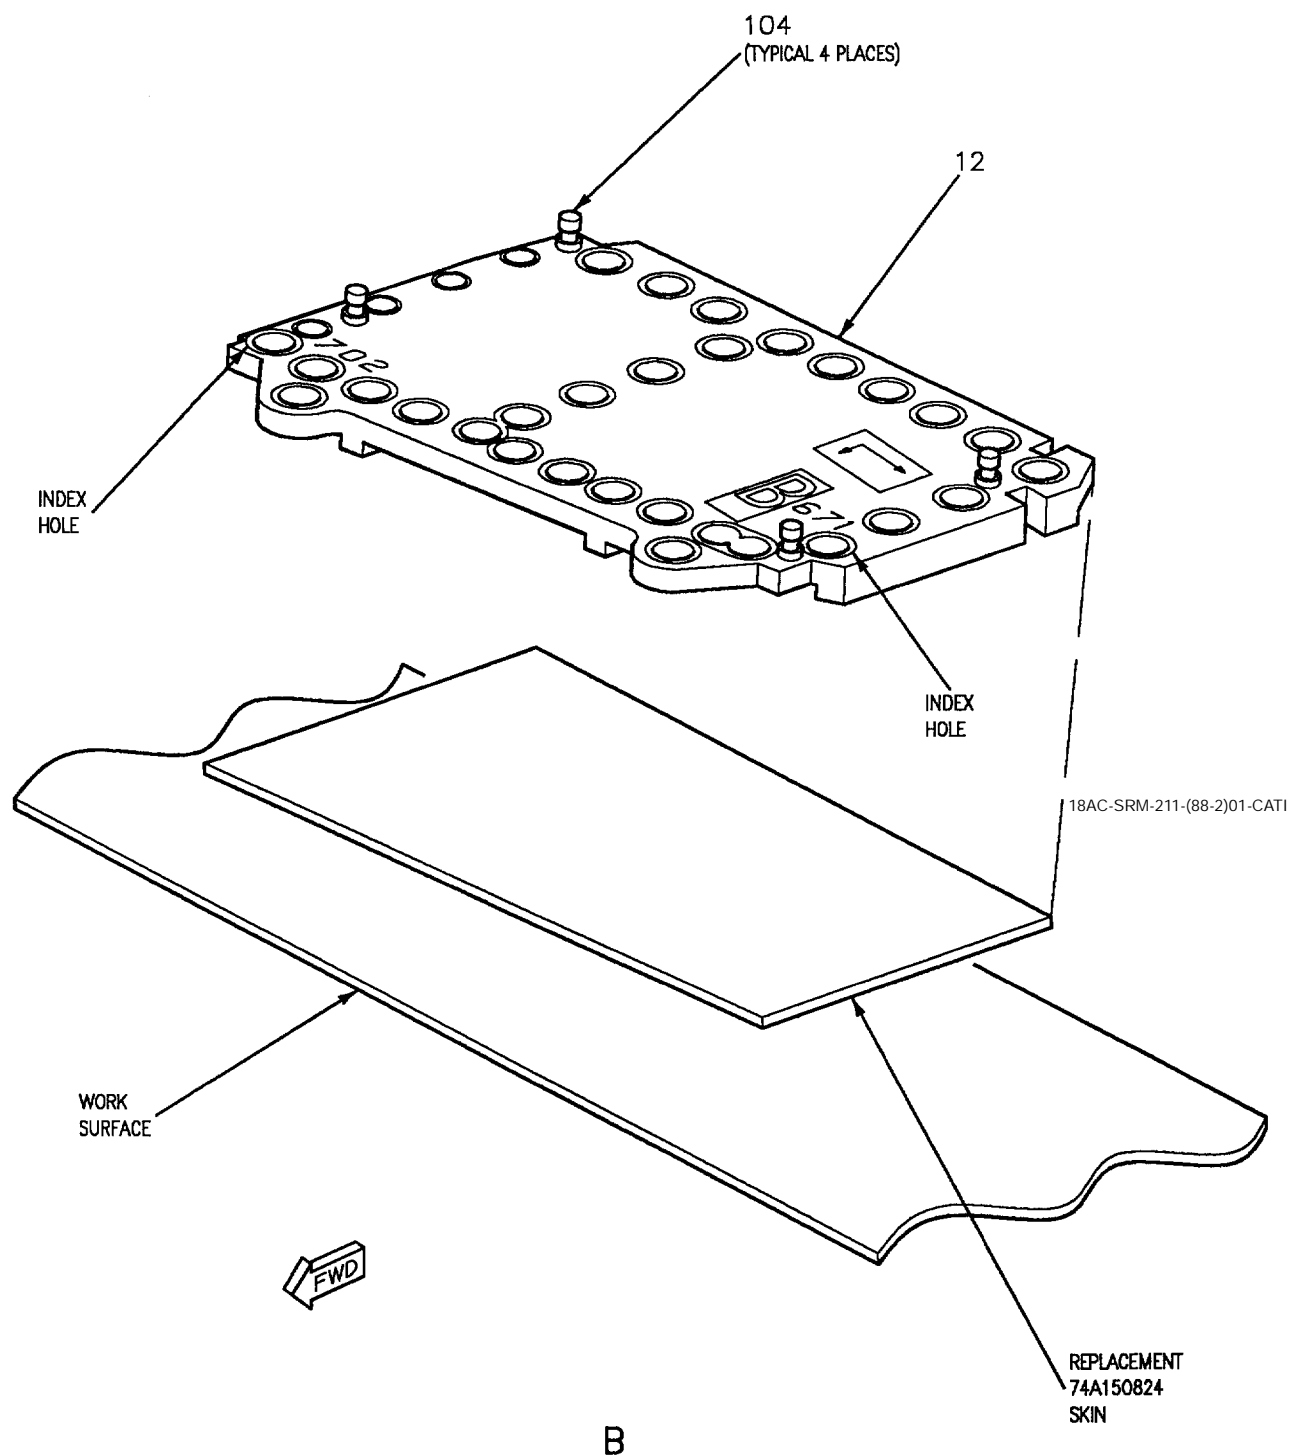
Installation of Plate Set for Drilling 74A150824 Skin (Sheet 2)
